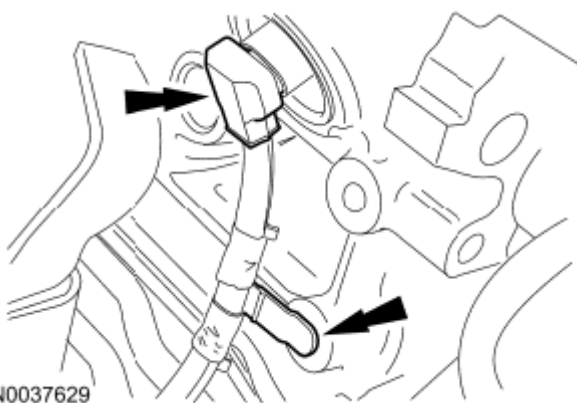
Locating Block Heater Electrical Connector And Wiring Harness Retainer
